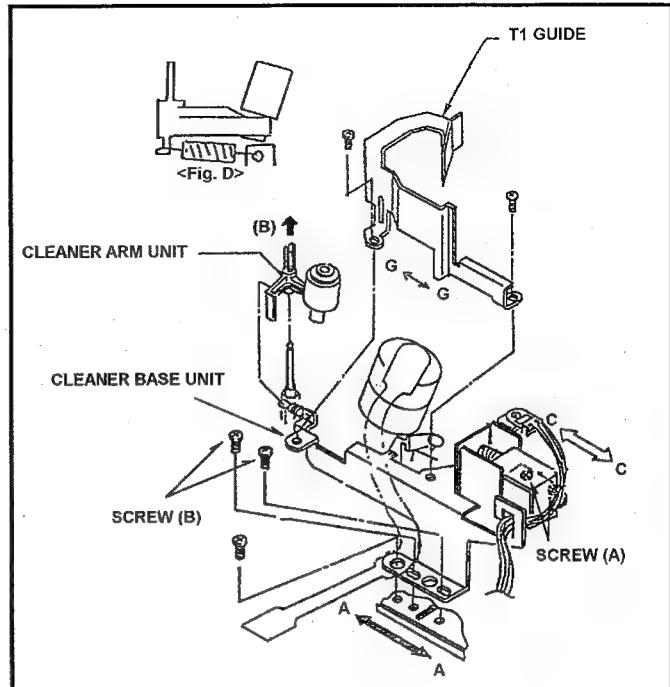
Cleaner Solenoid Position Adjustment
